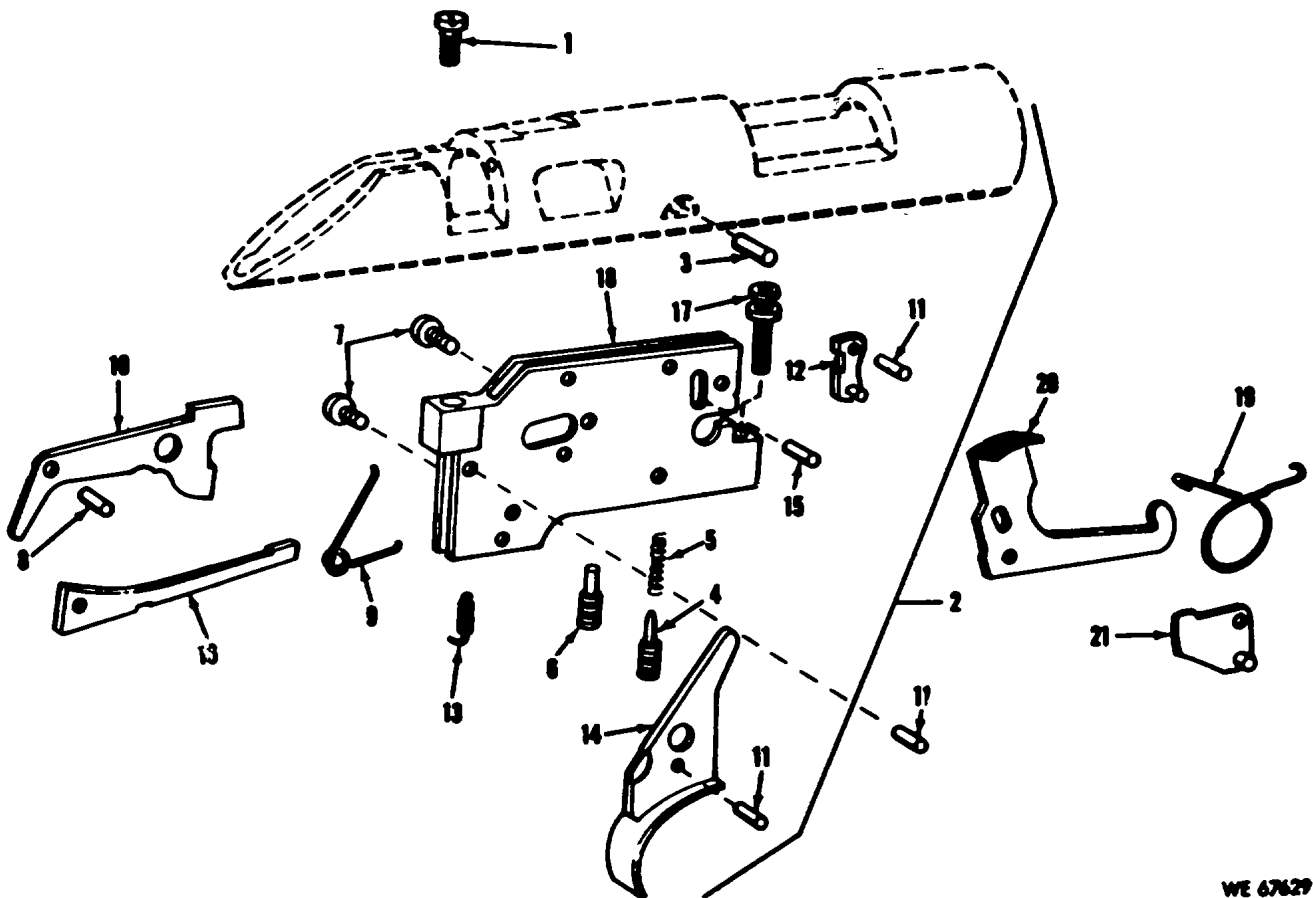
Breech bolt assembly for Caliber .22 Winchester Rifle, Model 52D - exploded view.
